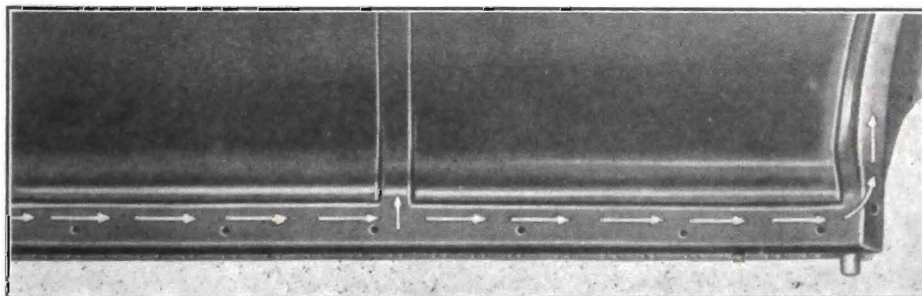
Showing rocker panel with molding removed. If dust enters the box type rocker panel through any unsealed opening, it may follow in the direction of the arrows towards the rear quarter and trunk section of the body.
